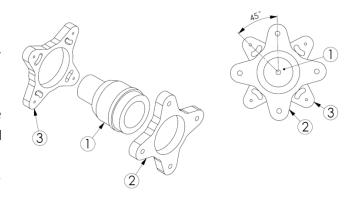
Steel Taylor Racing Wheel Hub (No Brake Rotor Mounting Surface)
